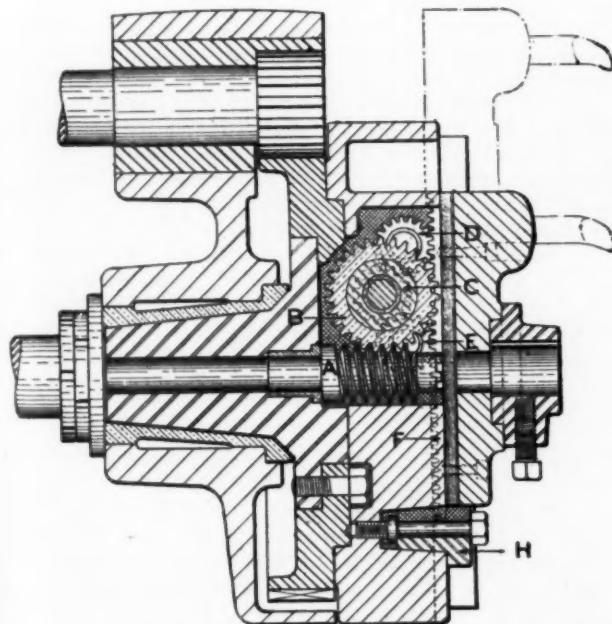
SECTION THROUGH FACING HEAD AND MAIN SPINDLE OF MACHINE SHOWN IN FIG. 18
